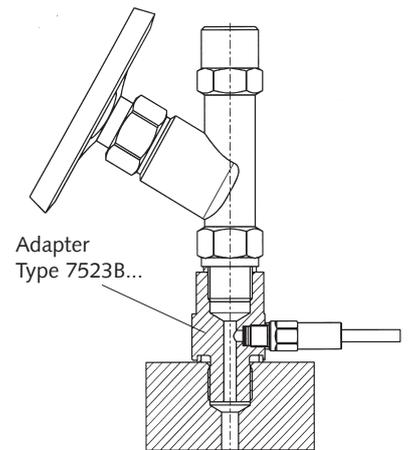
Sensor installed with adapter Type 7523B... underneath the indicator valve
